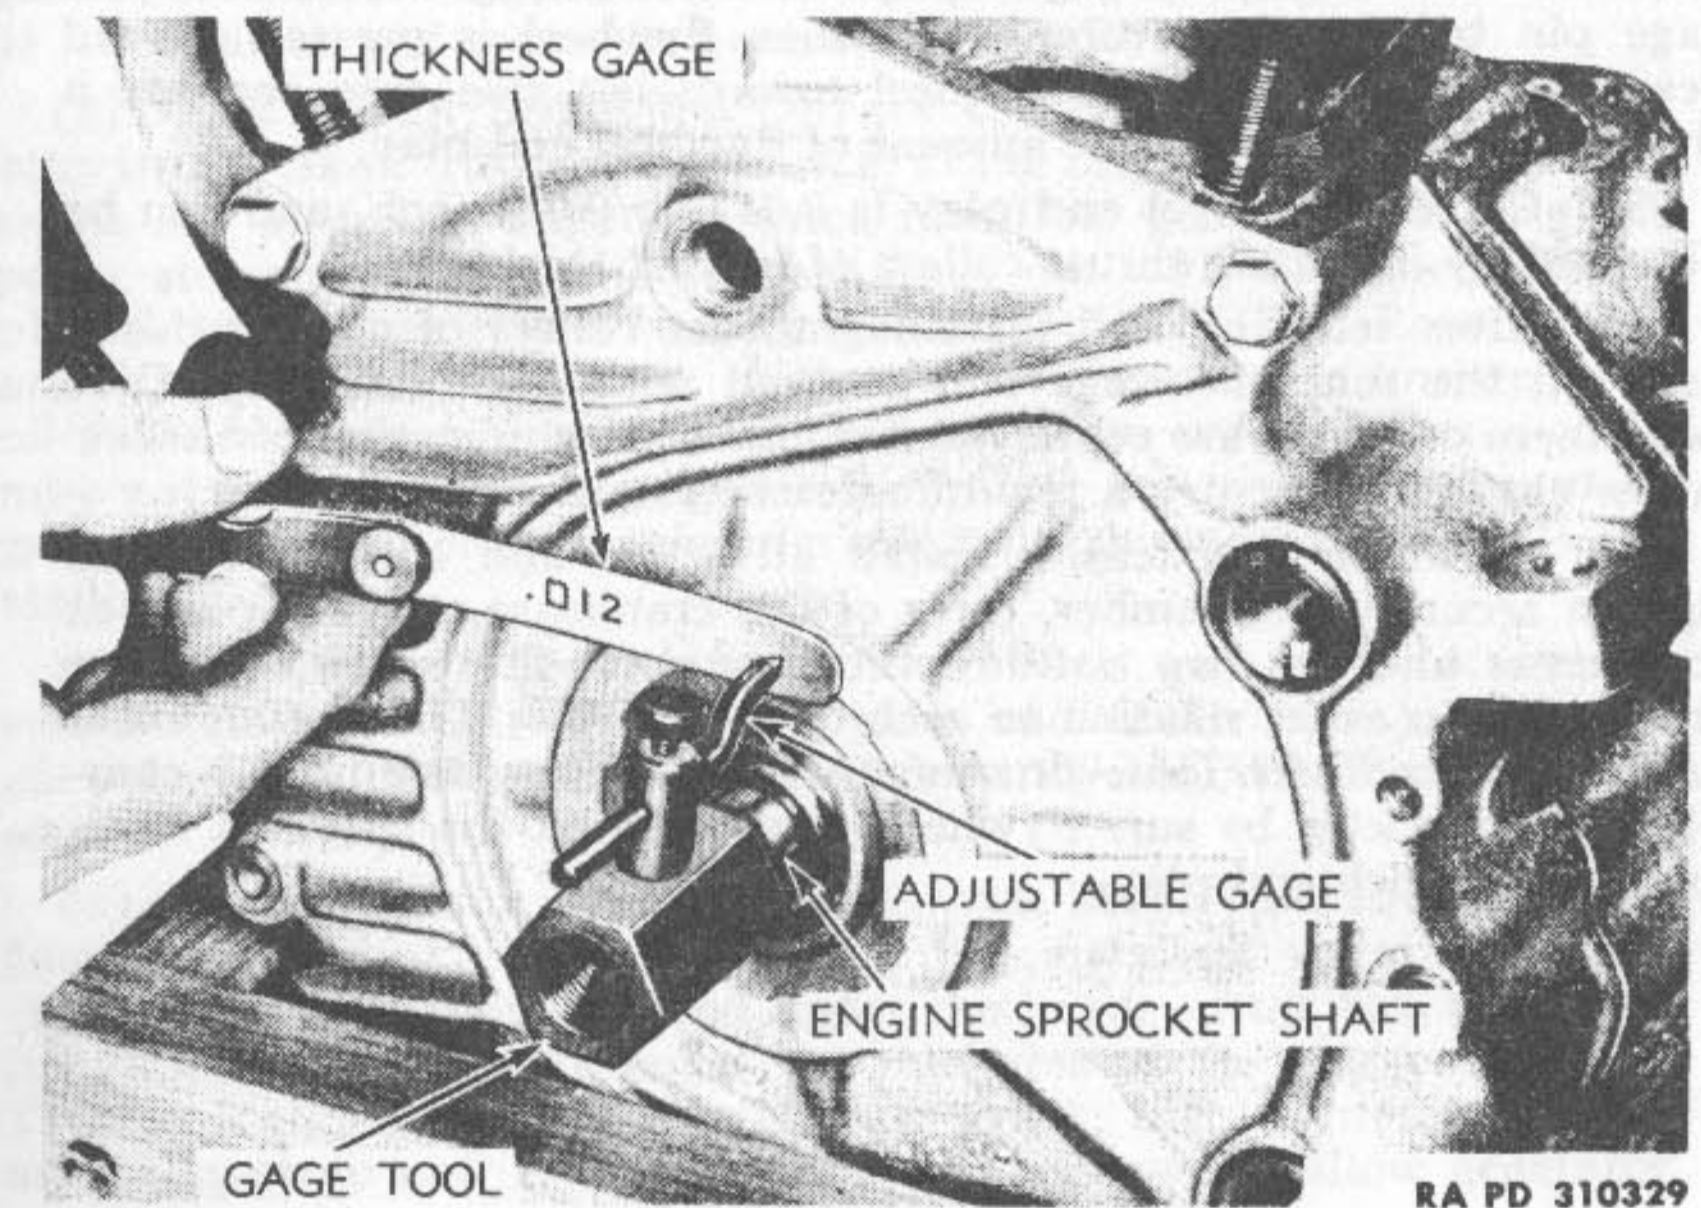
Checking End Play of Flywheels in Crankcase with Gage (41-G-198)
